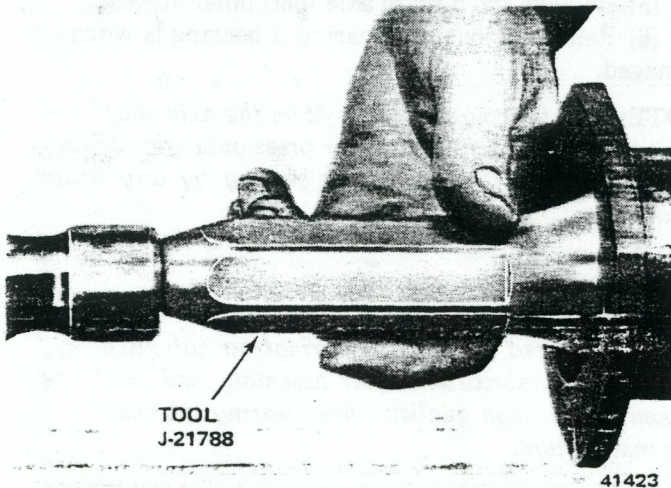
F-22 Inner Oil Seal Installation—CJ Models
